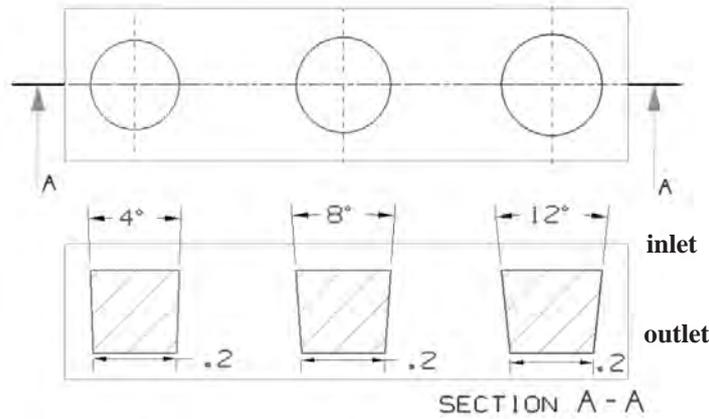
Types of axial holes geometry (All dimensions are in inches)
